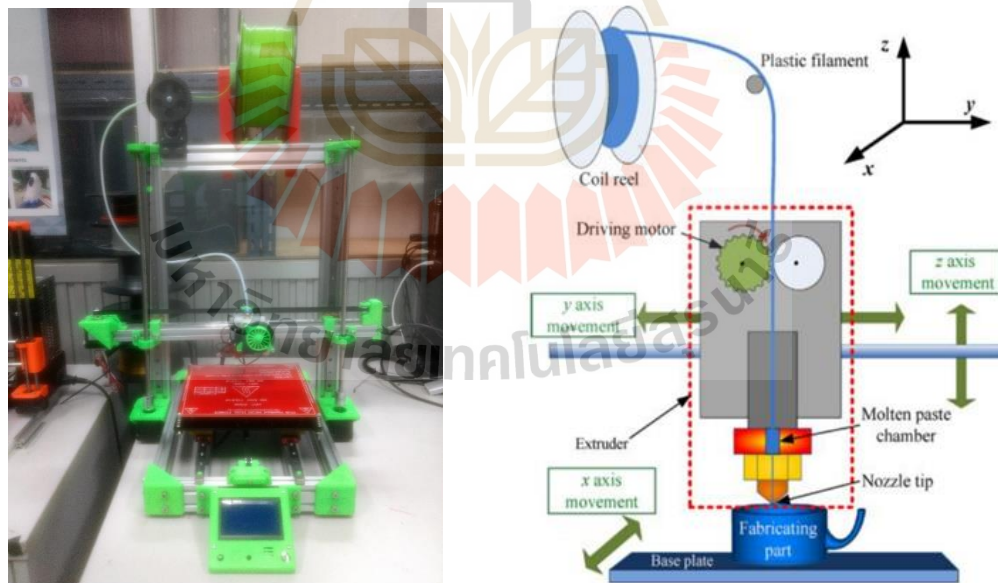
a) Shows the initial version of the constructed FDM 3D printer. This printer underwent testing for printing accuracy and calibration by printing a reference cube. b) Schematic of fused deposition modeling component (Jin *et al.*, 2015).
